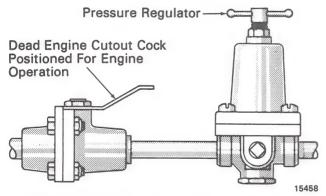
Dead Engine Cutout Cock And Pressure Regulator
